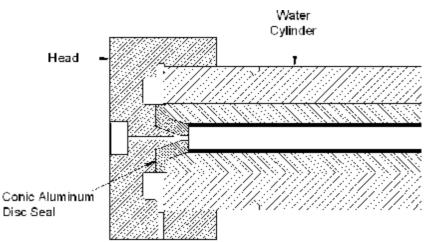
View of assembled cup-head and water cylinder in the new design
